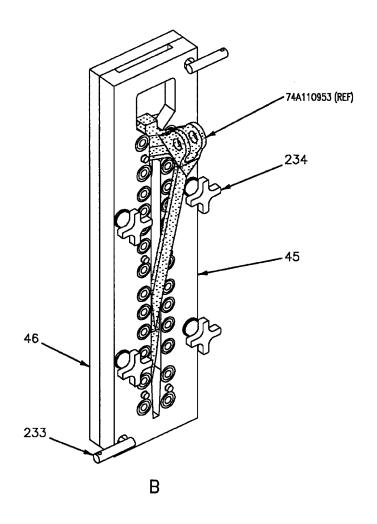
Drilling Holes in Skins or Substructure (Sheet 22)
